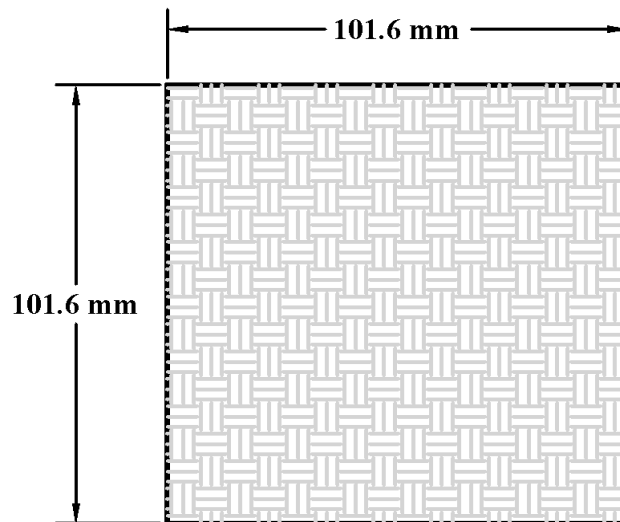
(b) Low velocity impact test specimen dimensions.
